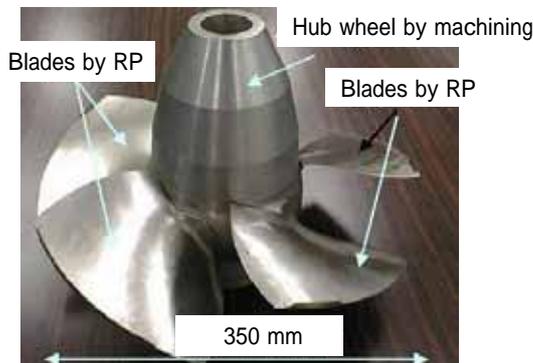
Stainless-steel bladed wheel built by SLS process (Courtesy Hitachi Corporation)
